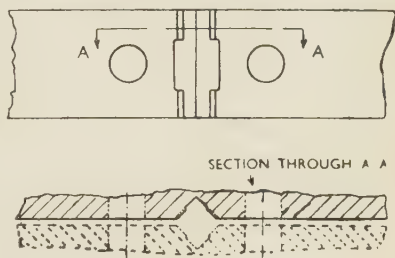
Sketch Showing Modified Grip Surfaces.
